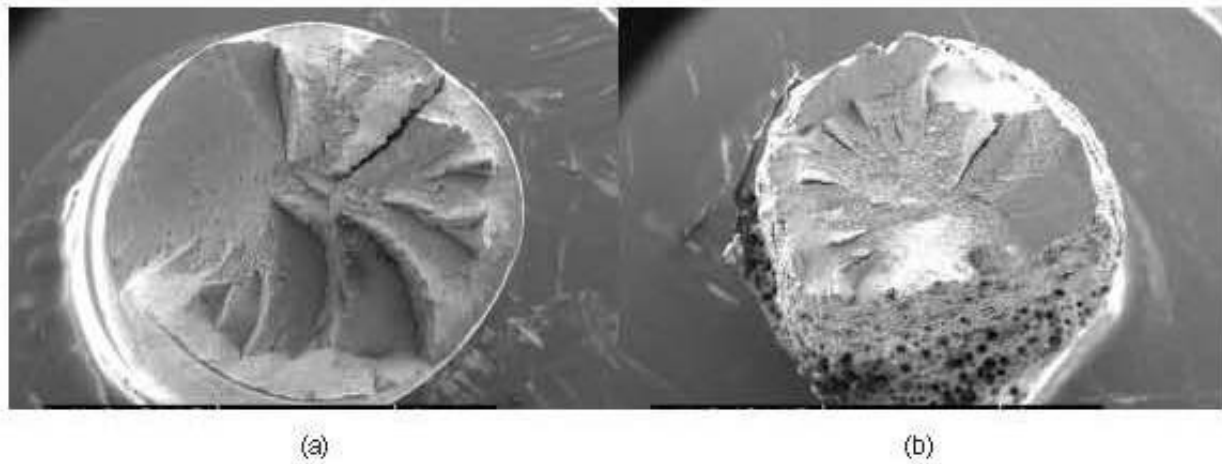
Fracture surface a) non-corroded wire, and b) corroded wire (Darmawan and Stewart, 2007)
